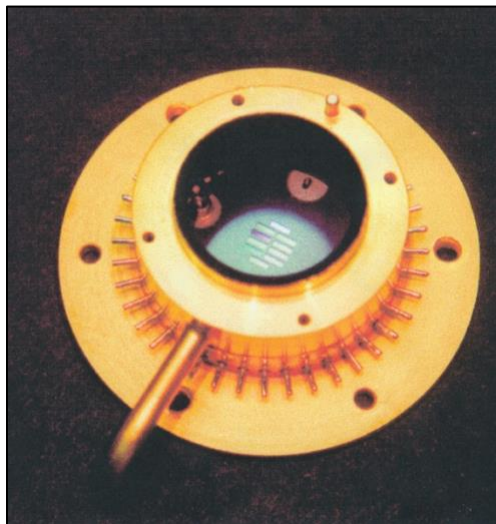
Filter array installed in bottom part of detector assembly and top part of detector assembly welded to the bottom part of the detector assembly.
